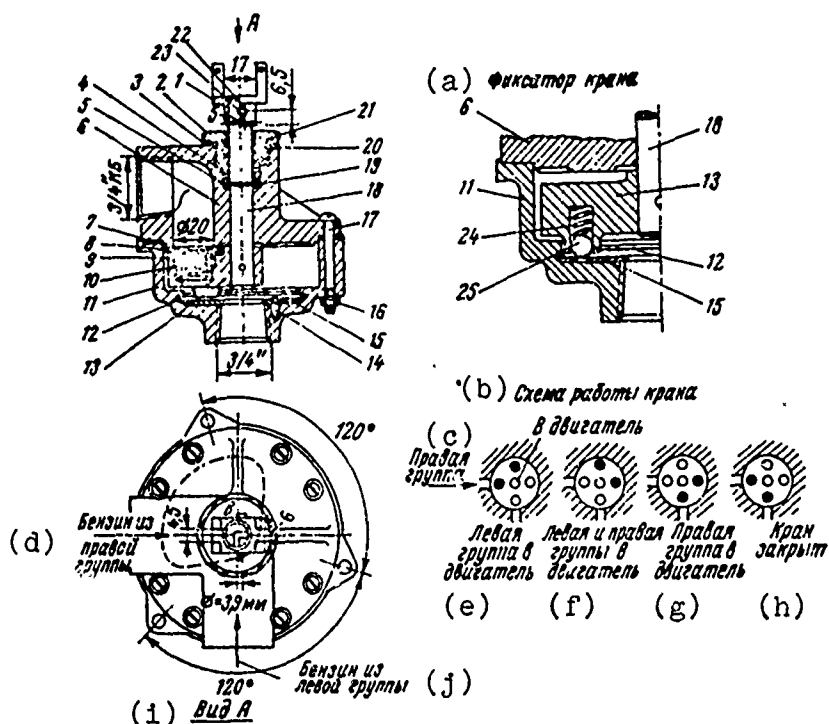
Fourway valve-type fuel cock: 1 - end piece; 2 - stuffing box nut; 3 - gasket; 4 - spring; 5 - washer; 6 - housing; 7 - gasket; 8 - slide valve (valve); 9 - supporting head; 10 - slide valve spring; 11 - cover; 12 - clamp latch; 13 - slide valve bracket; 14 - pin; 15 - steel plate of clamp; 16 - nut; 17 - coupling bolt; 18 - shaft; 19 - snap ring; 20 - stuffing box washer; 21 - thrust ring; 22 - cotter pin; 23 - bolt; 24 - clamp spring; 25 - ball.
